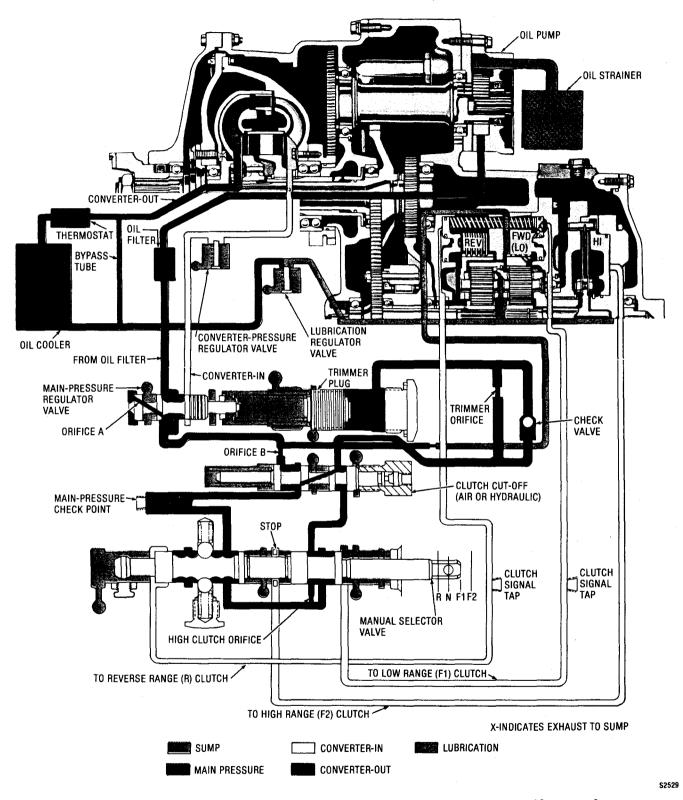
TT 2221-1, TT 2421-1 hydraulic system with clutch cutoff control
